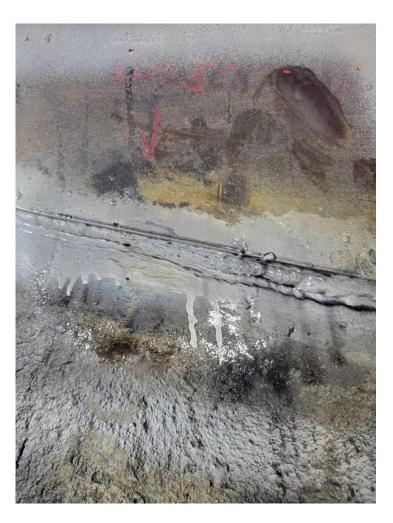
Can 146N - Indication Removed With Grinding - No Welding Needed
